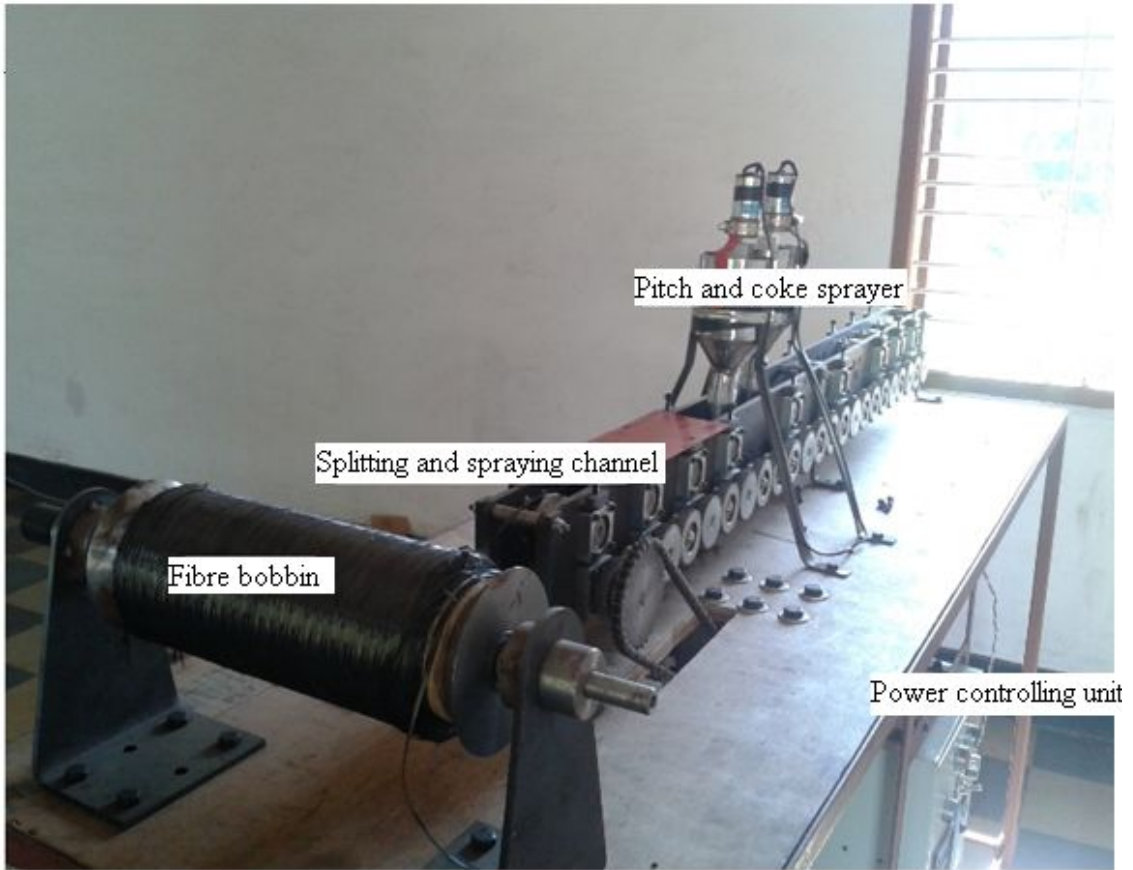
Photograph of PY machine with splitting and spraying arrangement
